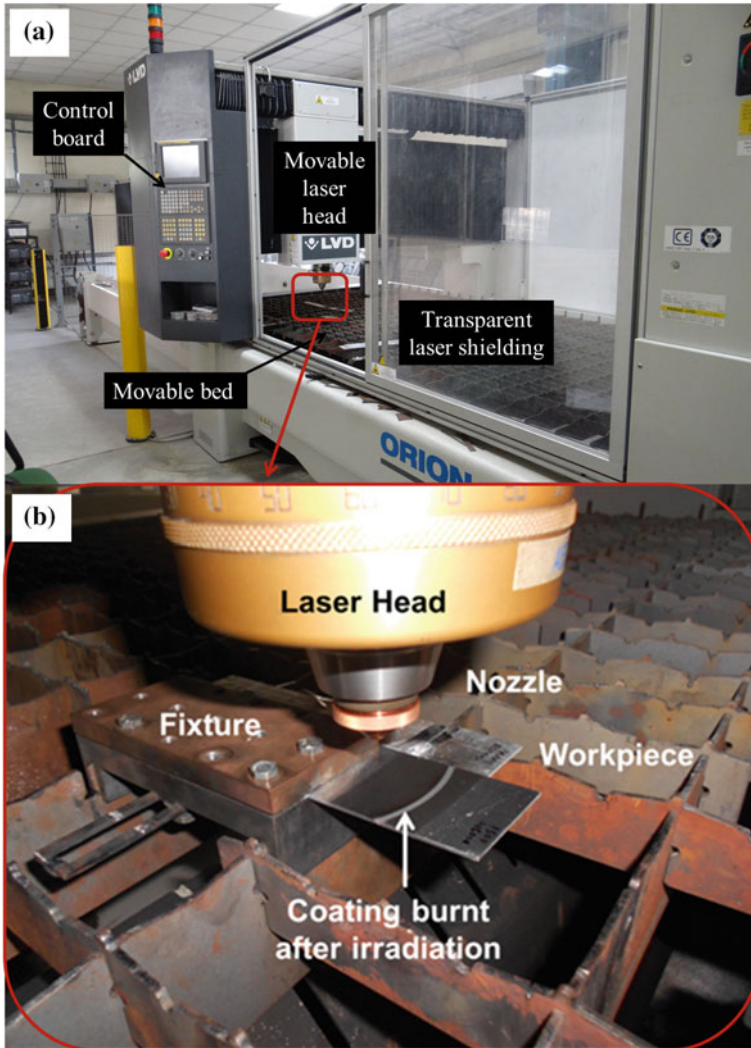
Details of experimental setup a laser machine, b worksheet holding
